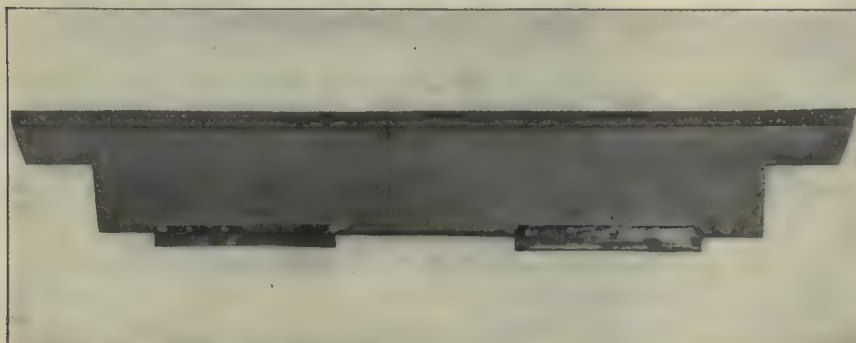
HEEL BOARD, WITH ANGLE IRONS SECURED IN PLACE BY SPOT WELDING
